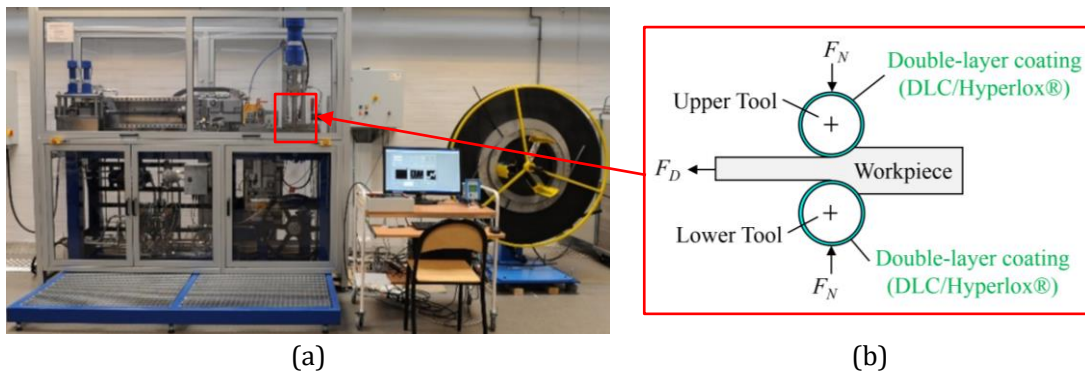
(a) Tribo-tester, UST2, and (b) strip reduction emulating ironing.
